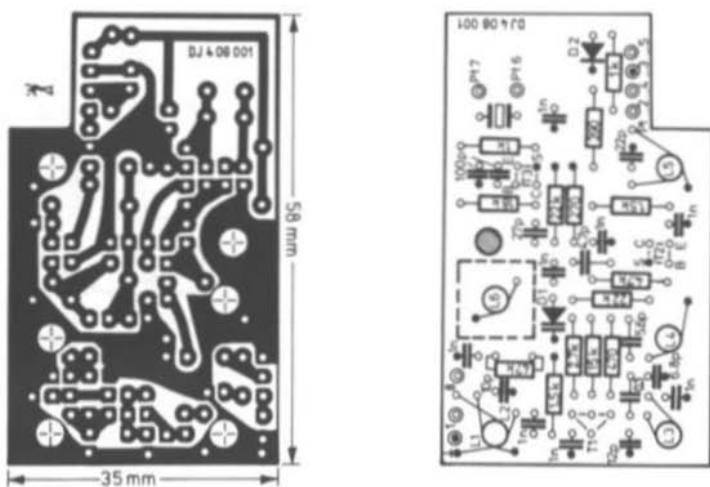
Printed circuit board of the converter (DJ 4 OG 001)
